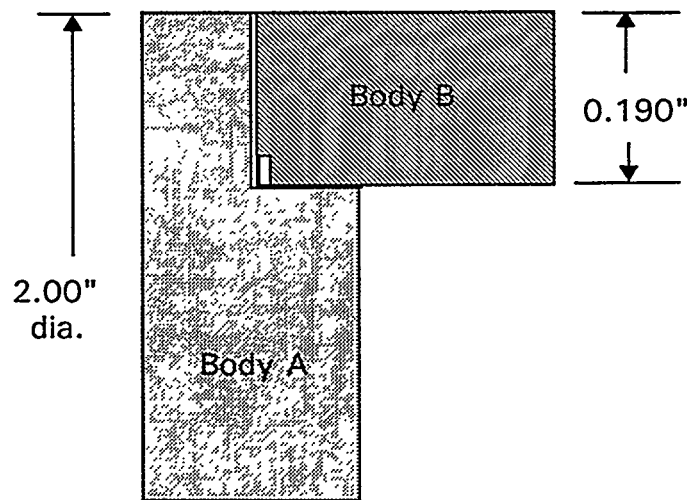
The final closure weld, “Body A” to “Body B.”
